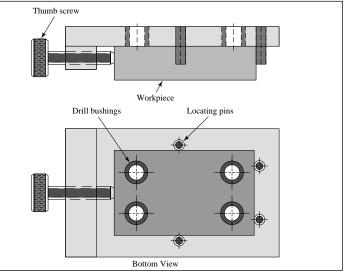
Drill jigs locate and clamp workpieces, and guide the drill through a drill bushing.
